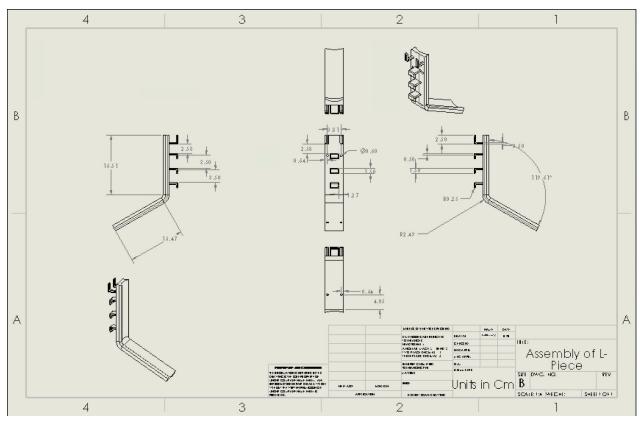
Detailed drawing of L-Piece including dimensions in centimeters.
